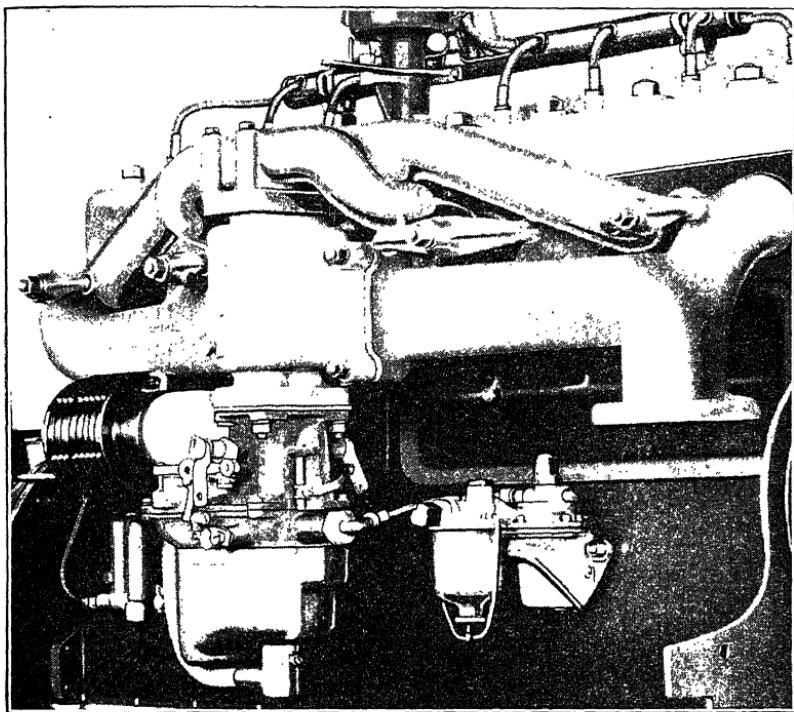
Down-Draft Manifold for Duplex Carburetor and Eight-in-line Engine
